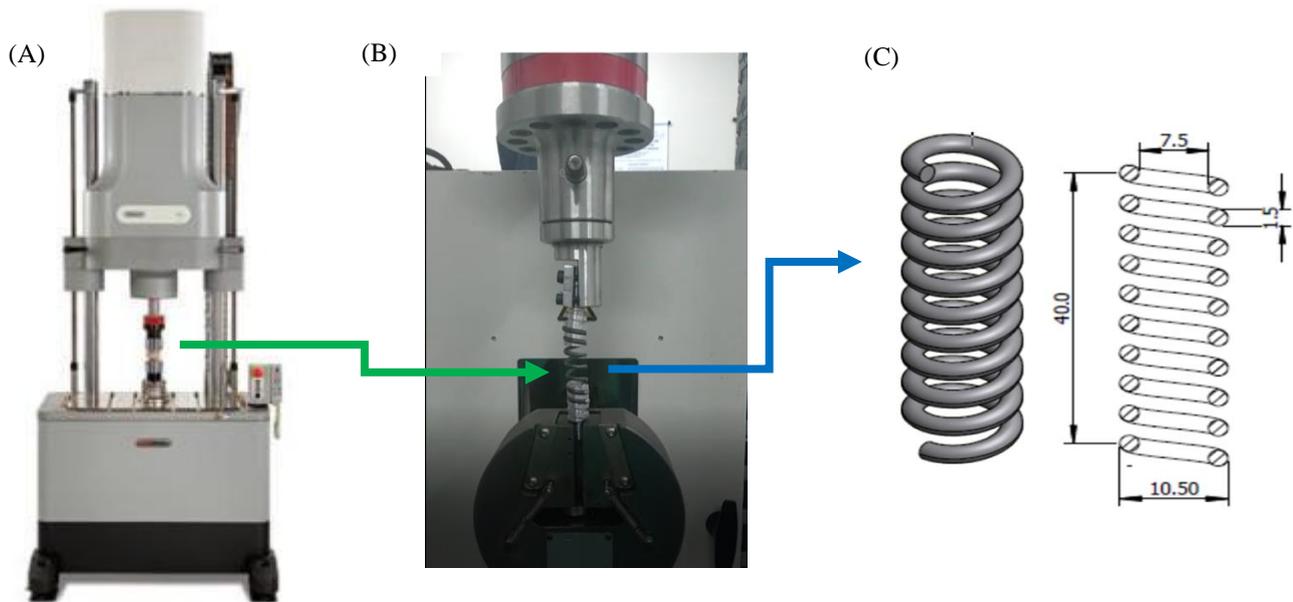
Mechanical tests of the Ni-Ti SMA springs. (A) Electro Pulse E10000 Dynamic Machine. (B) Experimental Assembly for test. (C) Mechanical design and dimensions in mm of the Ni-Ti SMA helical springs: height (H) - 40, inner diameter (Di) - 7.5, outer diameter (De) - 10.5, wire diameter (d) - 1.5.
